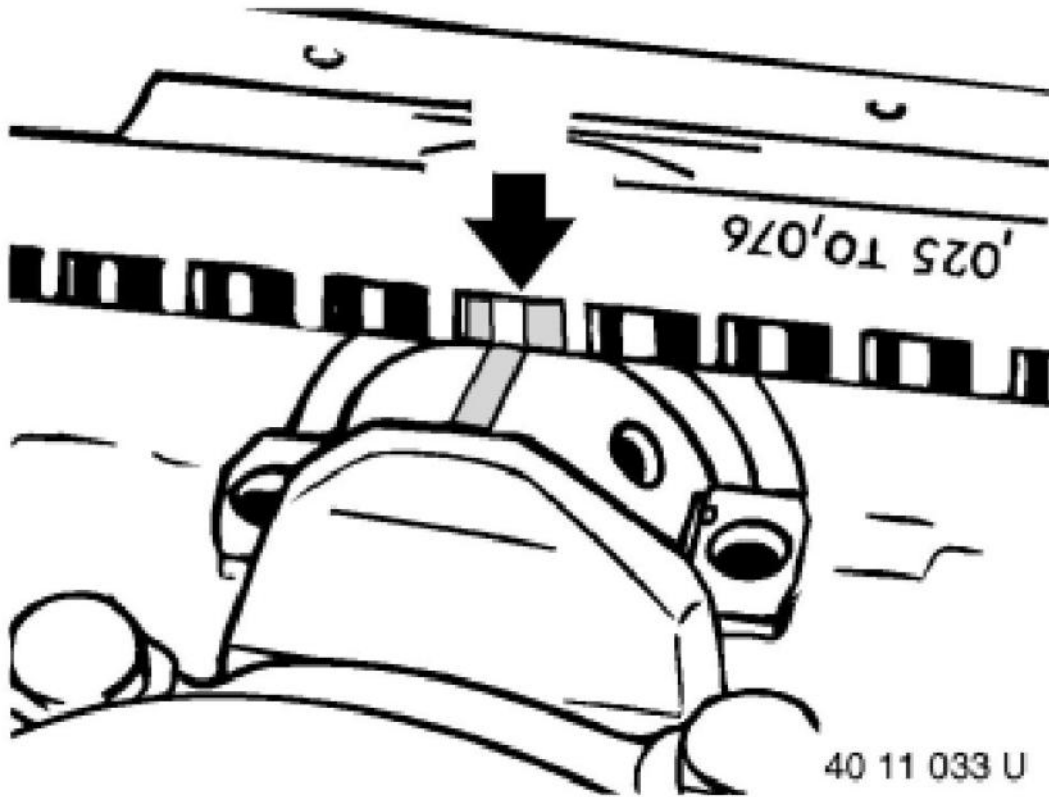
Checking Connecting Rod Bearing Clearance With Measuring Scale
